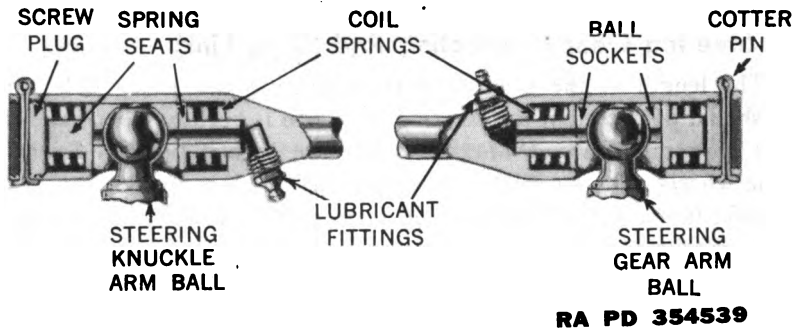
Steering Gear Connecting Rod (Drag Link) Cross Section.
